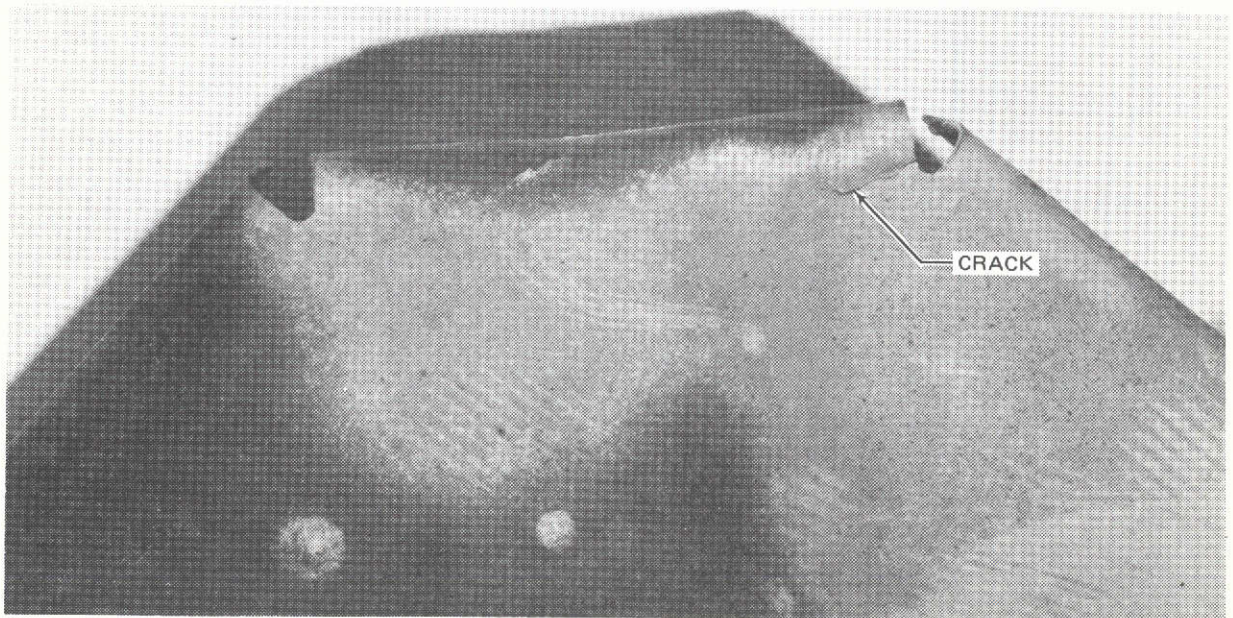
Corner of Overlapping Panel Joint Showing Crack at Relief Radius
